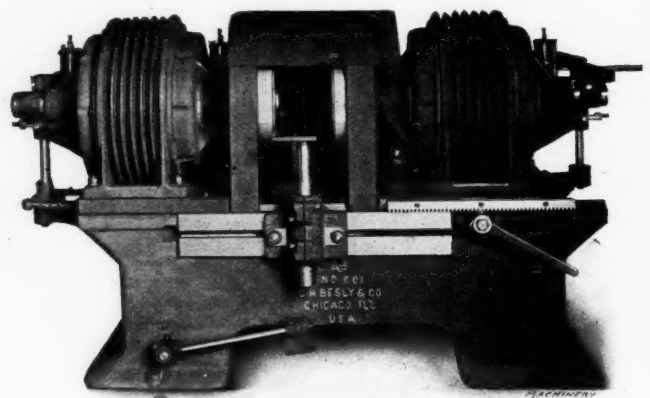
Front View of Besly Double-spindle Motor-driven Ring-wheel Grinder
